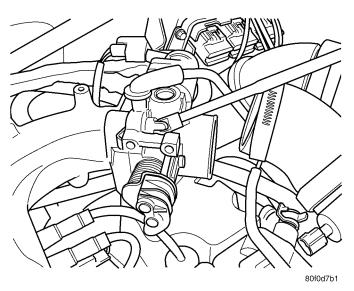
THROTTLE BODY BOLTS - 2.4L TURBO
